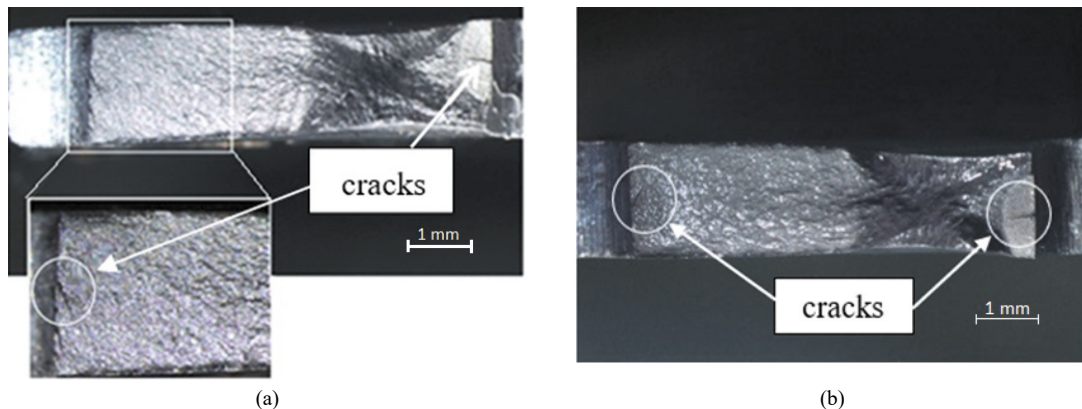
Fracture surface analysis by stereo microscope. (a) Side A and (b) Side B after fatigue test for the P₁ specimen.
